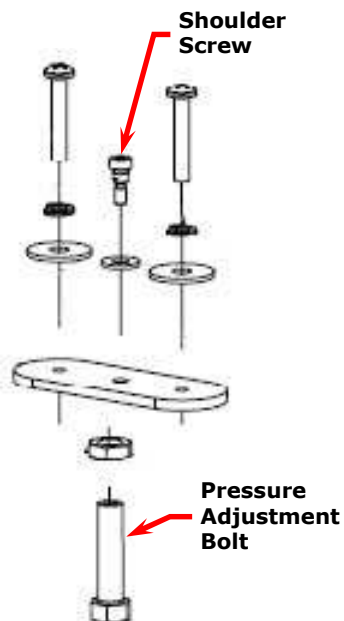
Pressure Adjustment Bolt/Shoulder Screw
